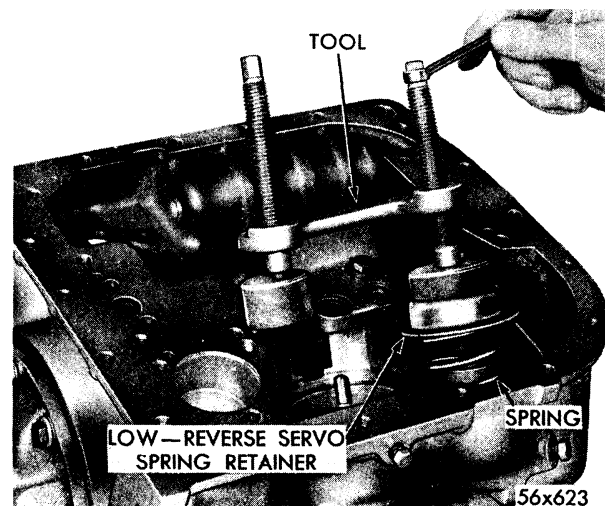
Compressing Low and Reverse Servo Spring and Retainer
